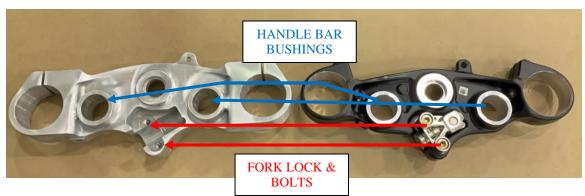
Install the handlebar bushings, fork lock, and the clutch cable guide in the raked top tree.
